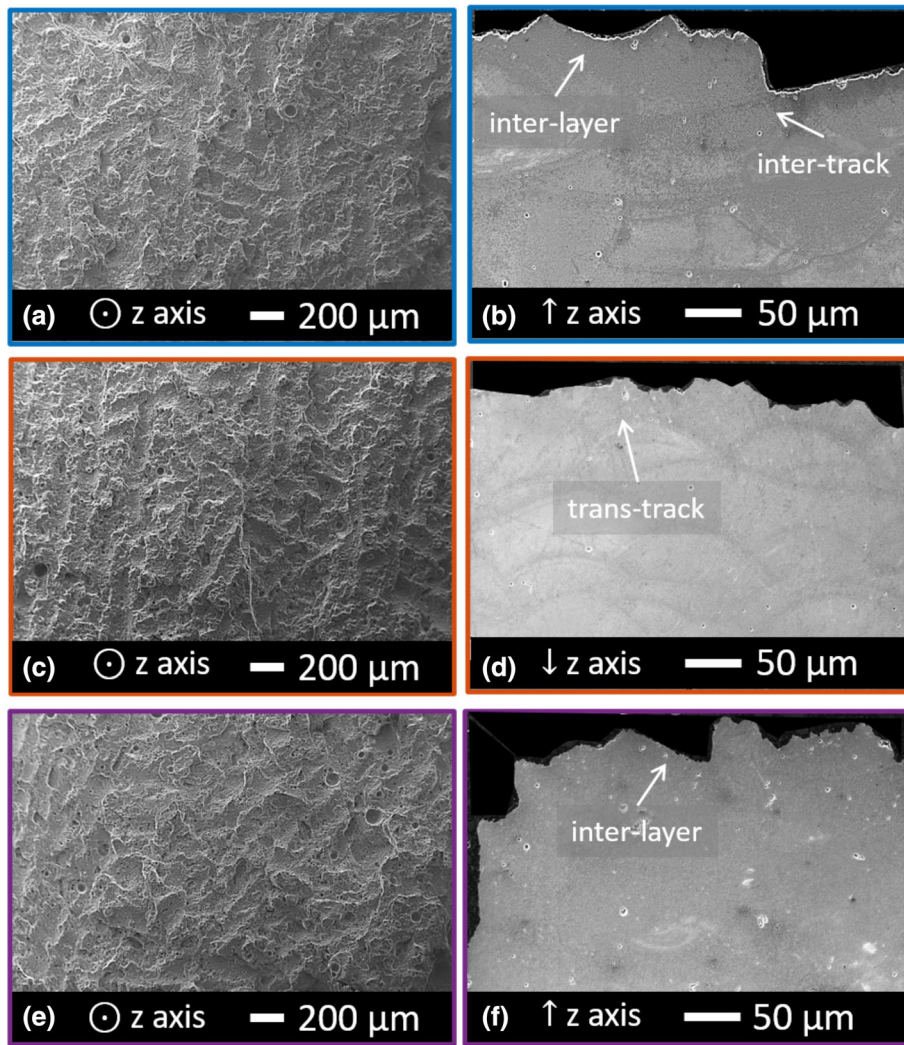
Fracture surfaces and profiles after impact test: (a, b) as-built; (c, d) T5 at 180 °C after 4 h; (e, f) T6-like at 180 °C after 4 h
